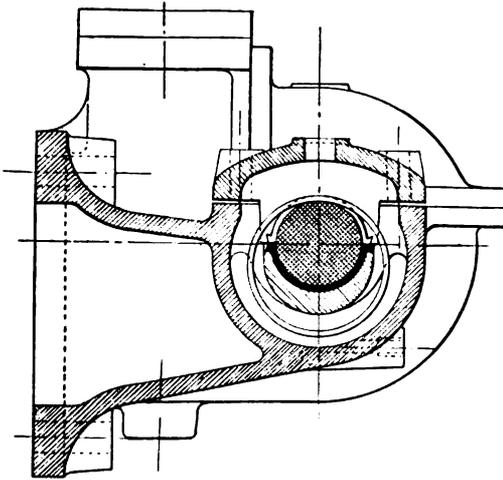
Cam-shaft Bracket and Ring Oiling Bearing.
